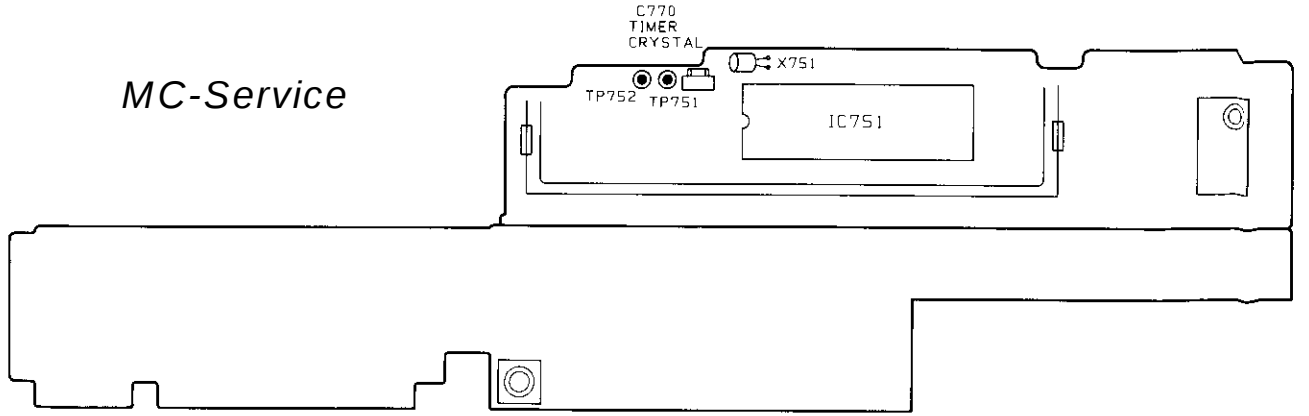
Components on Timer Circuit Board (Component Side) — VT-120E —
